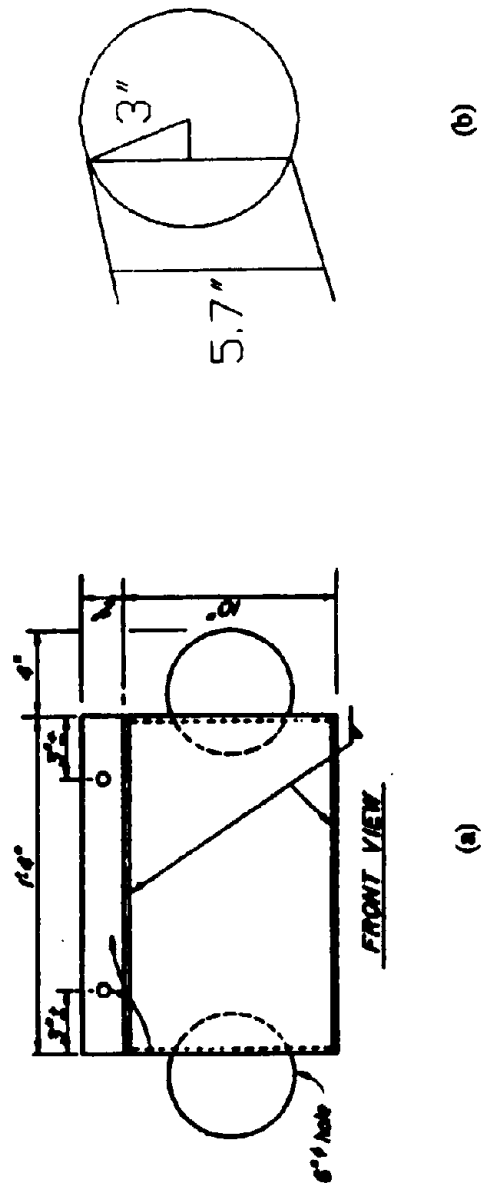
Cable Drum Detail. (a) Elevation View.
